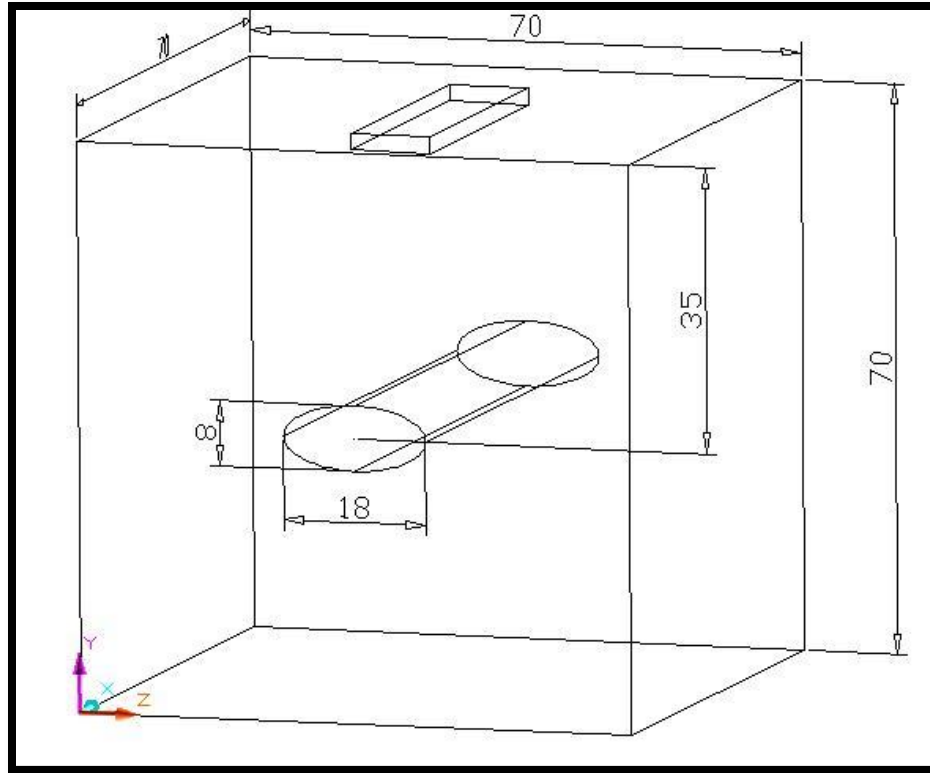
3D view for Dimension of Ellipse Horizontal shape cross-sectional cooling channels
